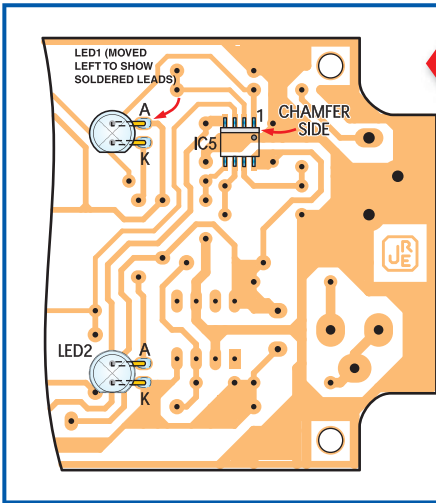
(left): use fine-gauge solder and a fine-tipped soldering iron to install the SOIC device (IC5) on the underside of the PC board.
